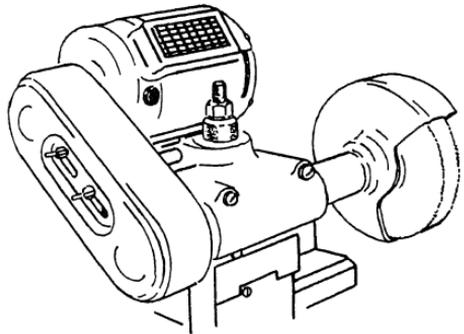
Lathe grinder for dry grinding of thermal spray coating.
